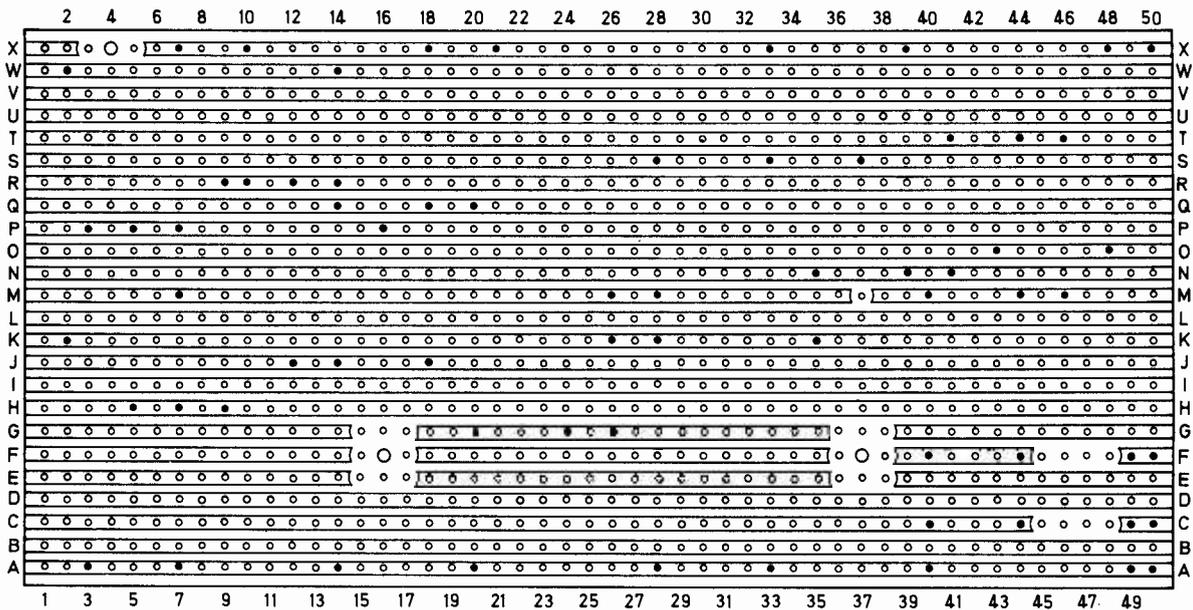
The copper strips should be cut away as shown above before components are mounted on the lower circuit board.
